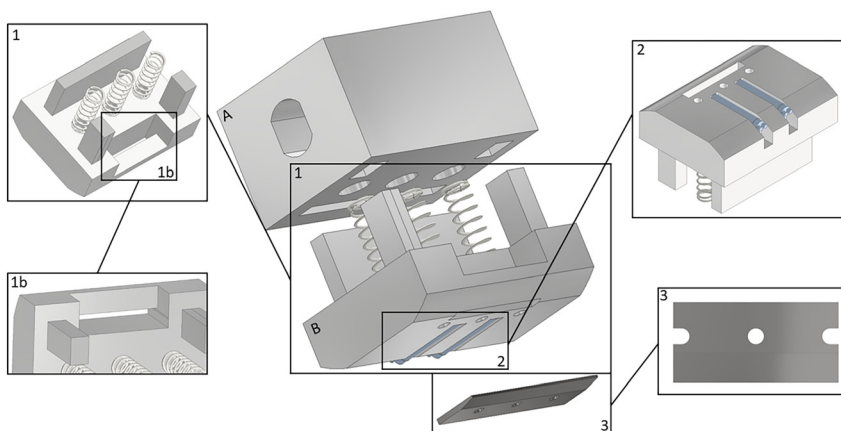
Exploded view of the sampling head designed at KIT-TMB, including detailed images of the most important components.
